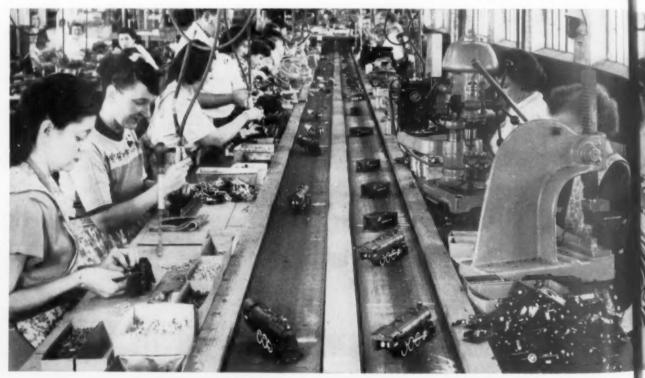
Locomotive assembly line where all components are attached as the locomotives and tenders progress along the conveyor. In this line the chassis subassembly with wheels, motor and gearing is assembled to the body together with stepping relay, headlamp, chugger, smoke unit, etc.
